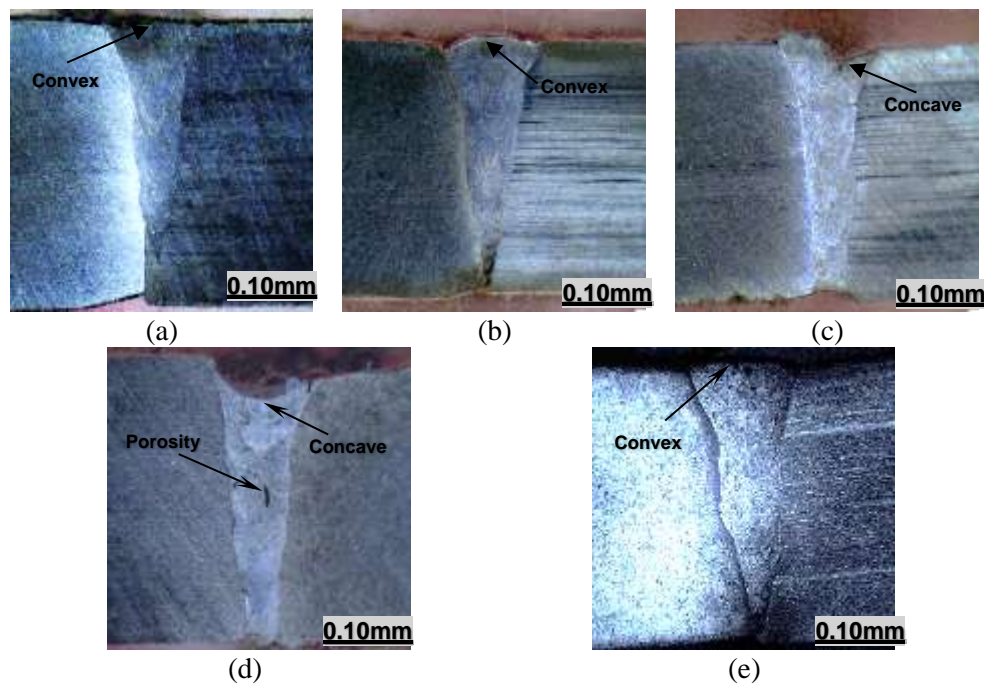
Transverse cross section of welded joints at welding speed. (a) 1.3 mm/s (b) 1.5 mm/s (c) 1.7 mm/s (d) 1.9 mm/s (e) 2.1 mm/s
